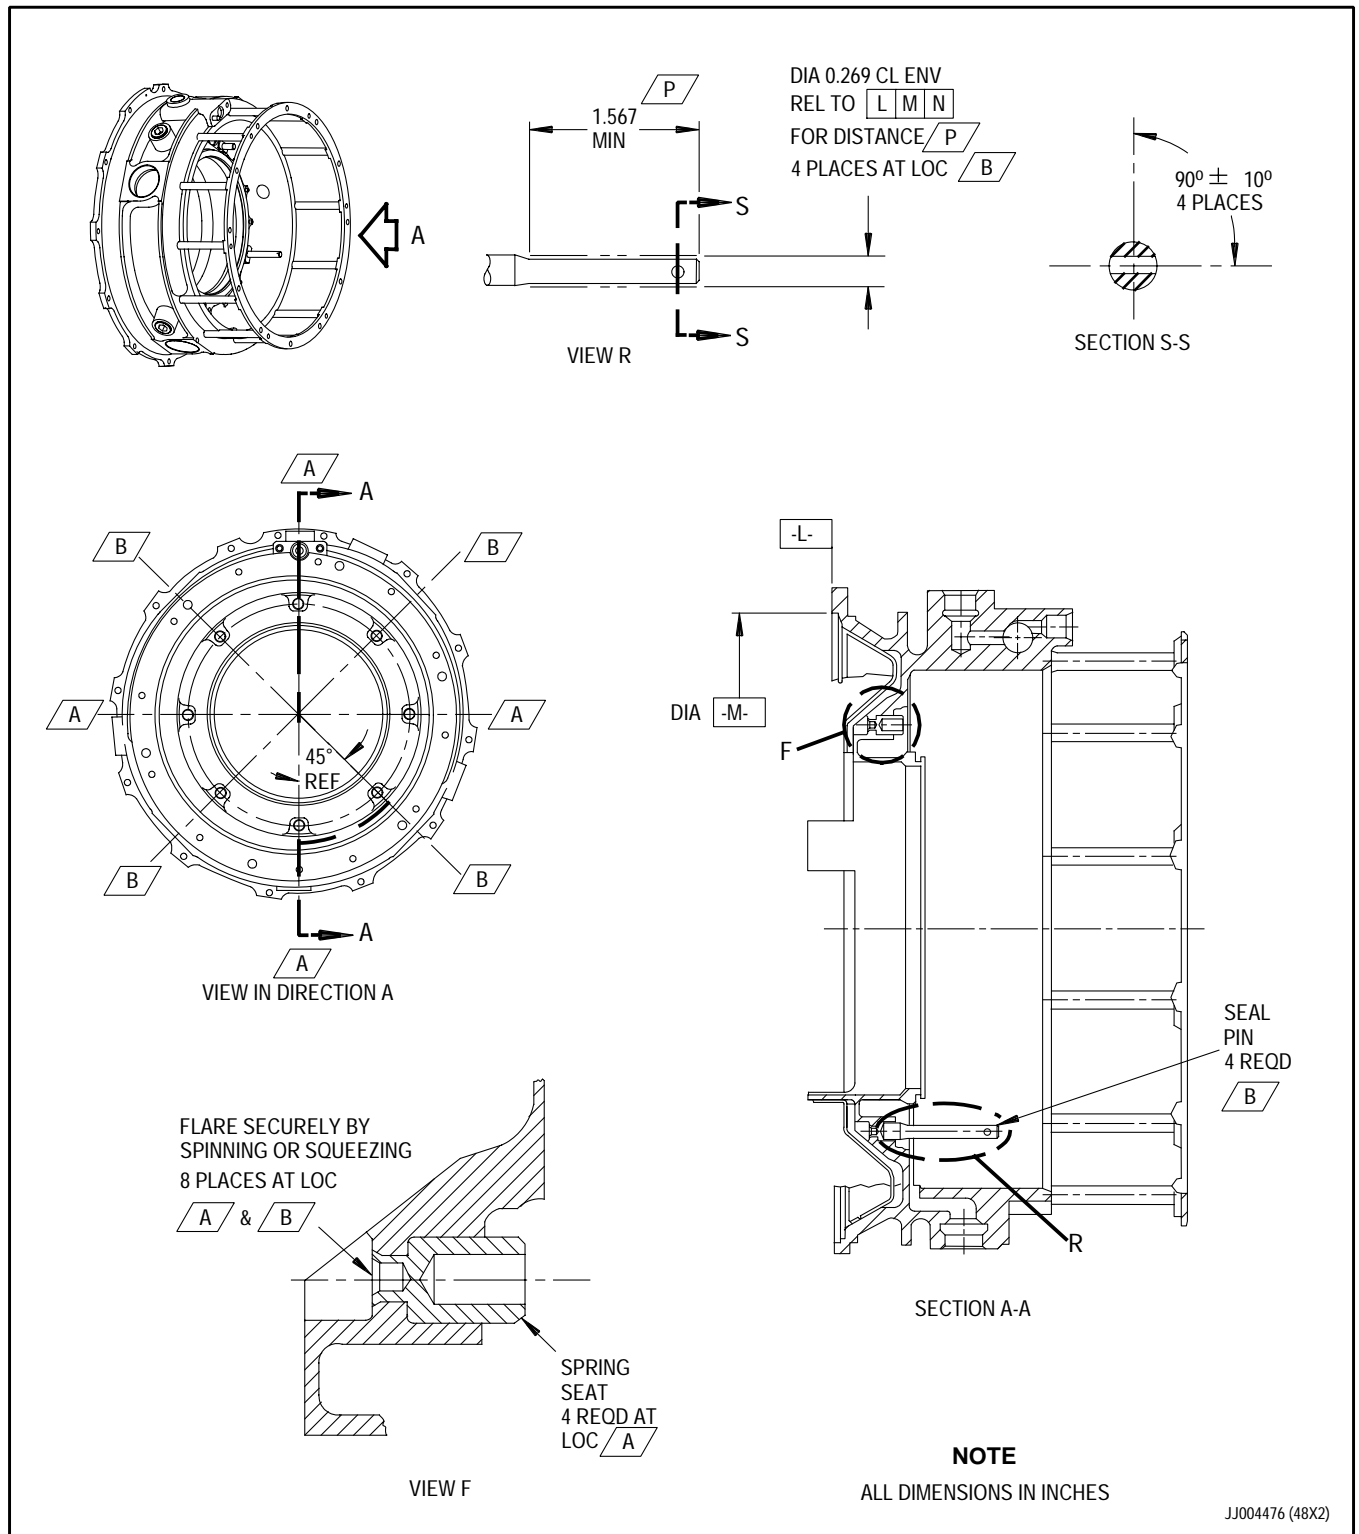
No. 5 Bearing Seal Assembly - Seal Pin and Helical Compression Spring Seat Replacement
